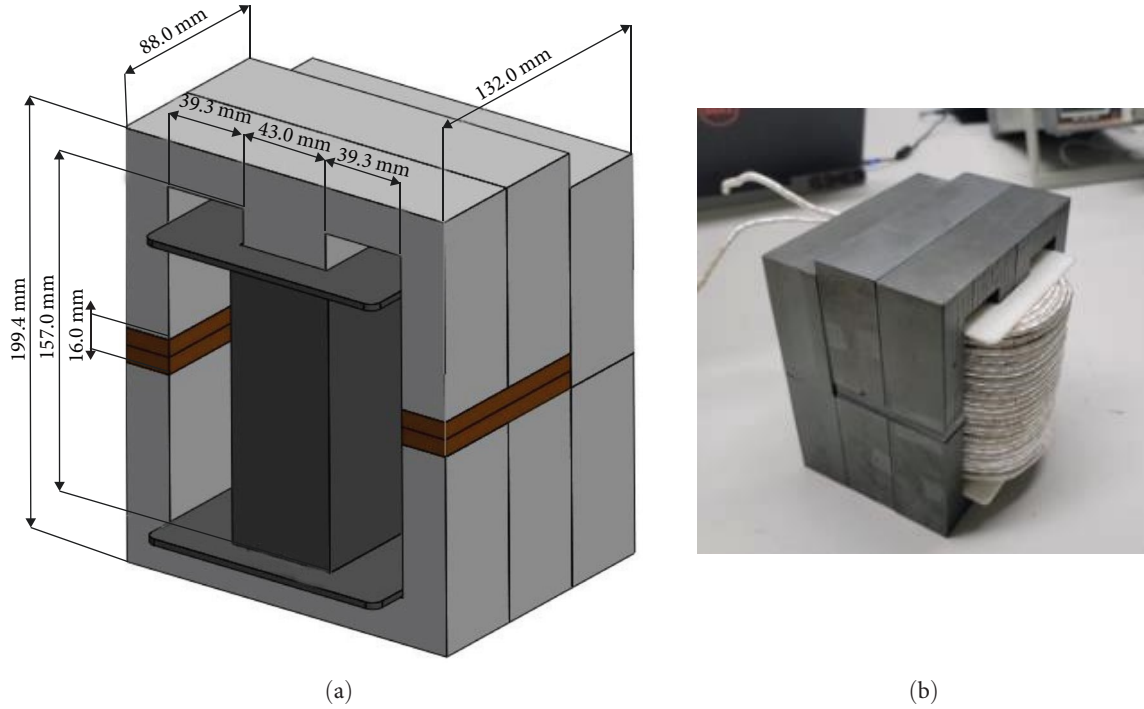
Case 2 reactor design; (a) 3D view and (b) photo of a prototype.
